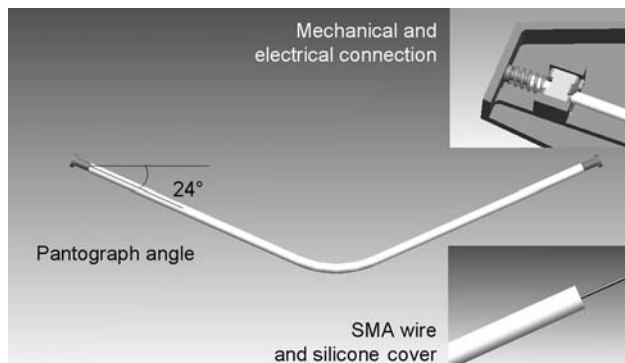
Shape memory wire final layout with mechanical crimps and silicone covering
